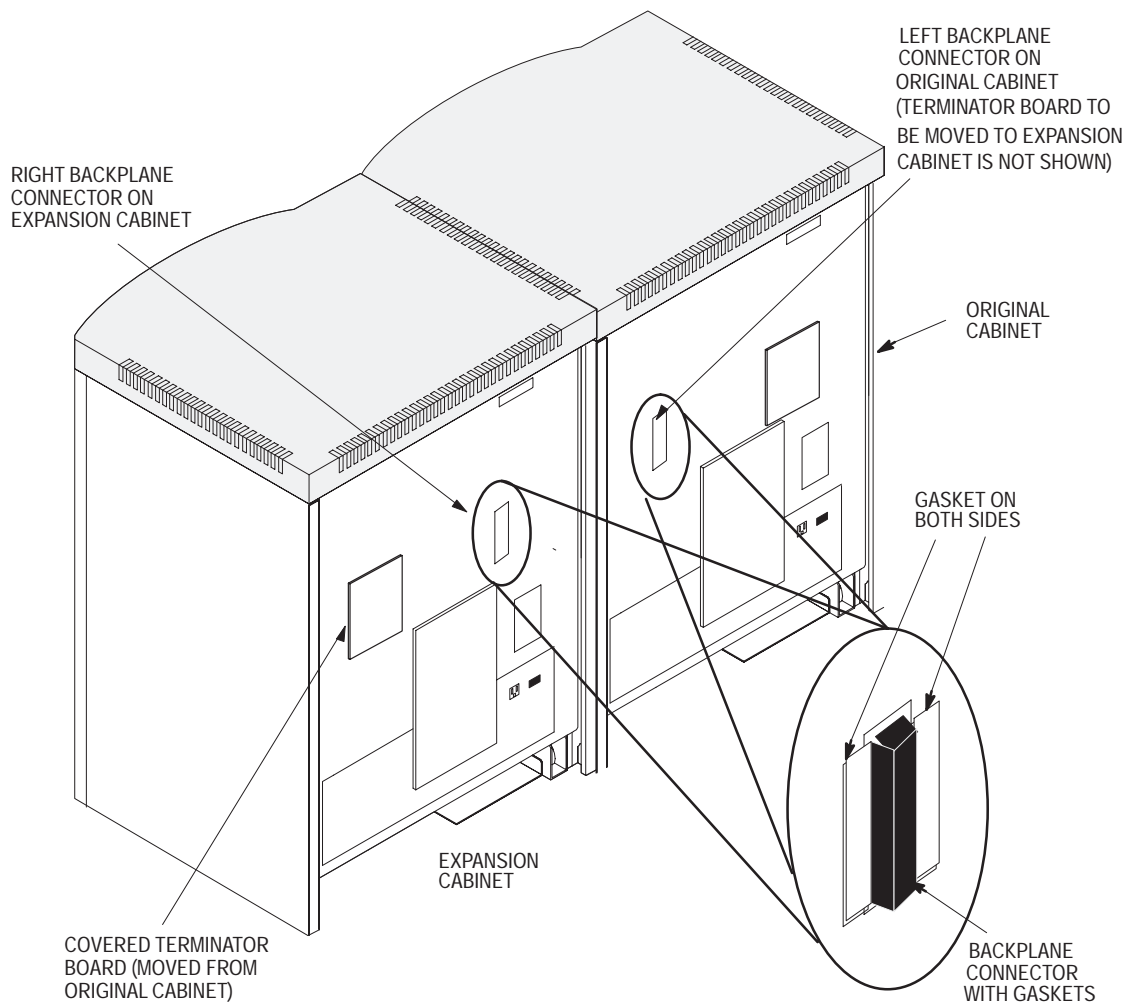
Rear View of Cabinets After Terminator Board Is Moved.
